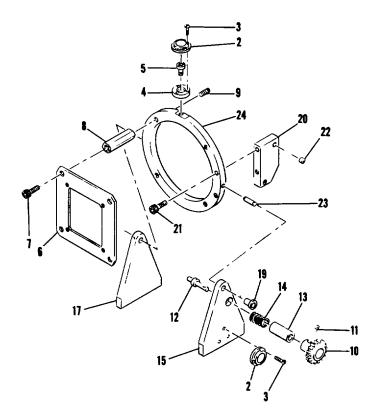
Gyro Tester, Indicator Assembly (Sheet 1 of 3)
